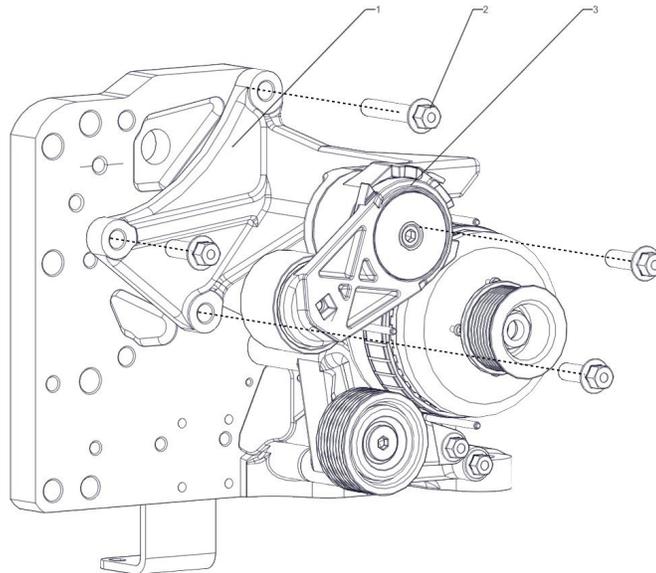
Left-Hand Automatic Belt Tensioner Assembly
